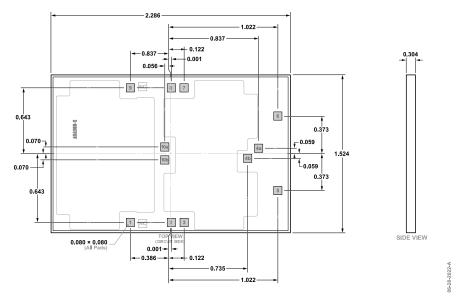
12-Pad Bare Die [CHIP] (C-12-5) Dimensions shown in millimeters
